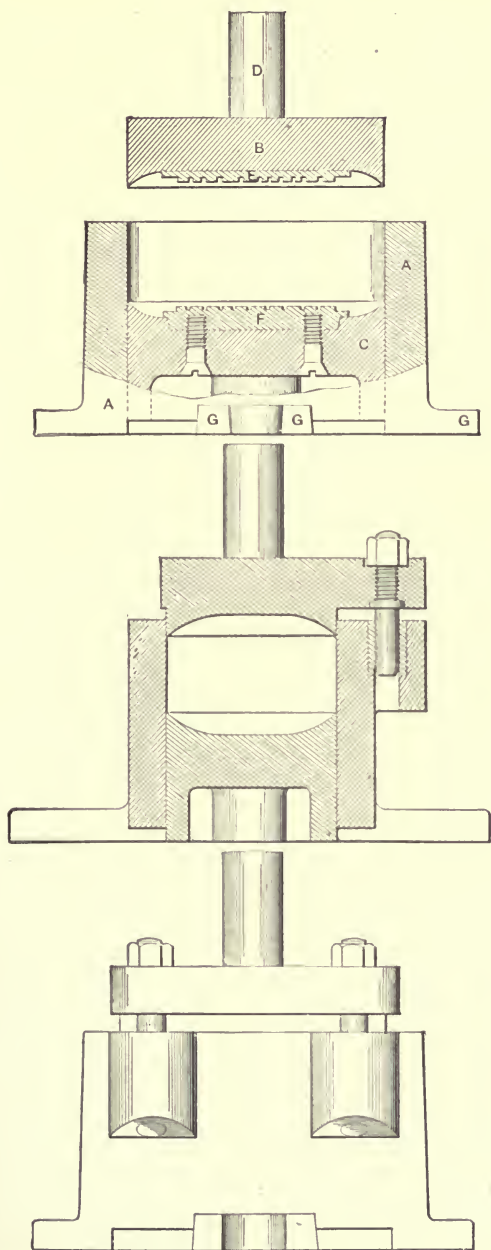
Combination Die. (*A*, box; *B*, upper die; *C*, lower die; *D*, shank; *E*, fixed panel; *F*, changeable panel; *G*, flanges.)
